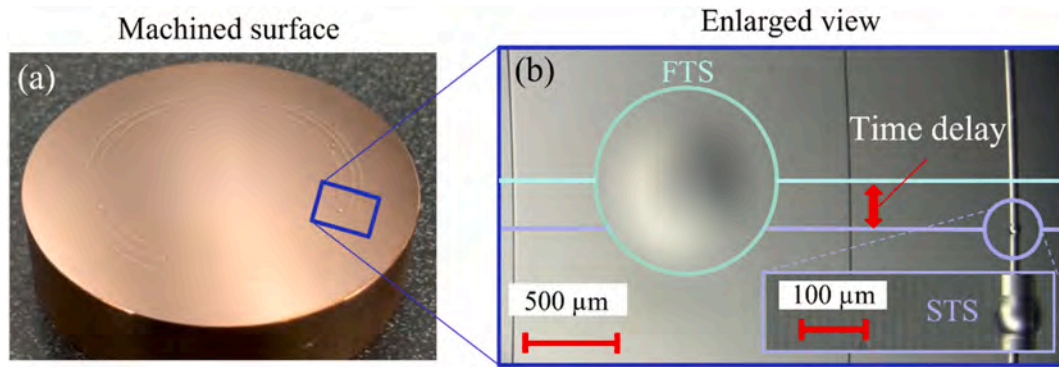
Observation and measurement results of a machined surface: (a) optical image and (b) enlarged view by laser microscopy.
